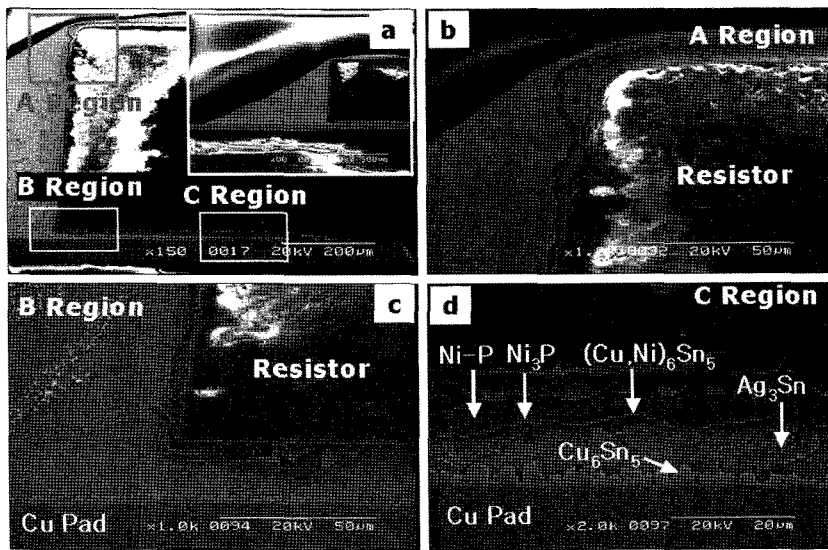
Cross section images of 3216 chip resistor soldered with Sn-3.0 Ag-0.5 Cu after thermal shock test, 1800 cycles: (a) overall shape of joint, (b) magnified view of region A, (c) magnified view of region B, and (d) magnified view of region C.
